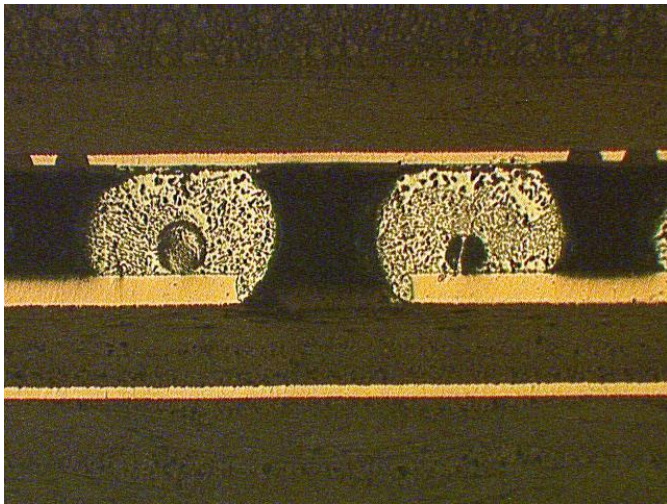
CSP-100 Solder Joints, Board 166, Component U32, SAC305/SnPb, Failed @ 3417 Cycles
